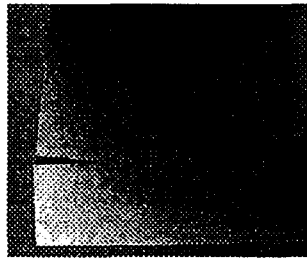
Sound weld obtained by modified welding conditions determined from fuzzy rule-based method(welding speed=5.6(mm/sec), arc voltage=27(V), welding current=235(A), gas flow rate=16(l/min), offset distance=0(mm))
